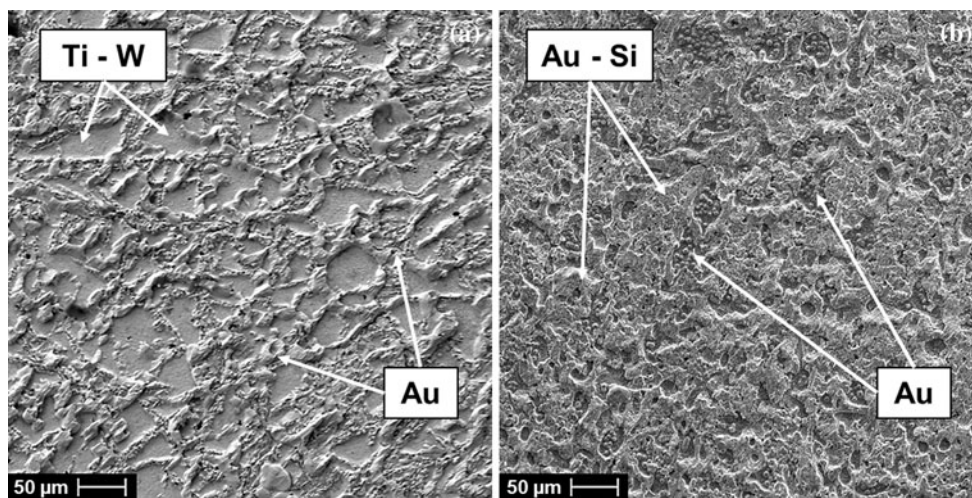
Fracture surfaces of Al₂O₃ joined with a Au–12Ge and b Au–3Si
